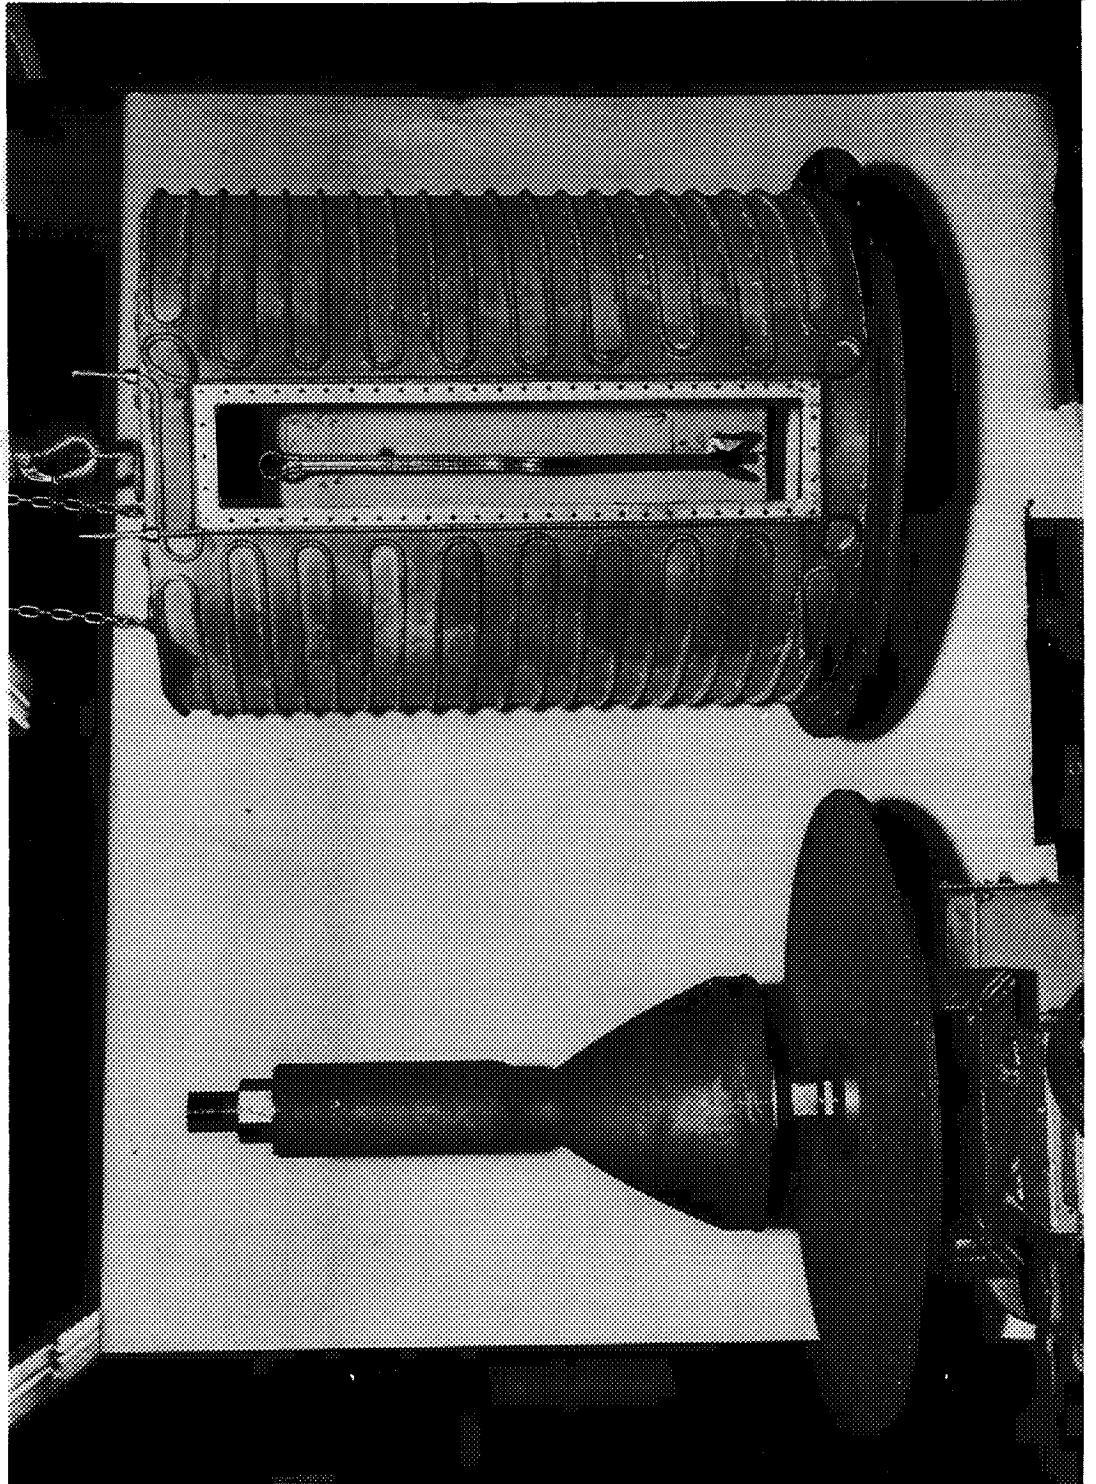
Regeneratively Cooled Thrust Chamber Assembly
